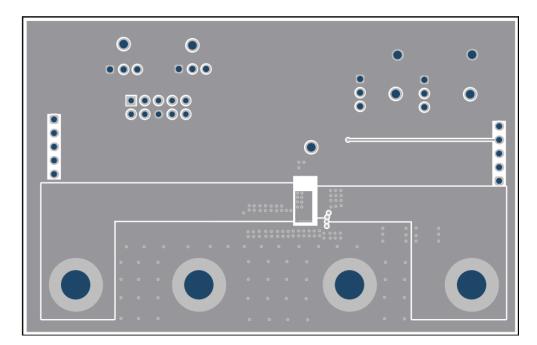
TLV61290EVM-076 Bottom-Side Layout
